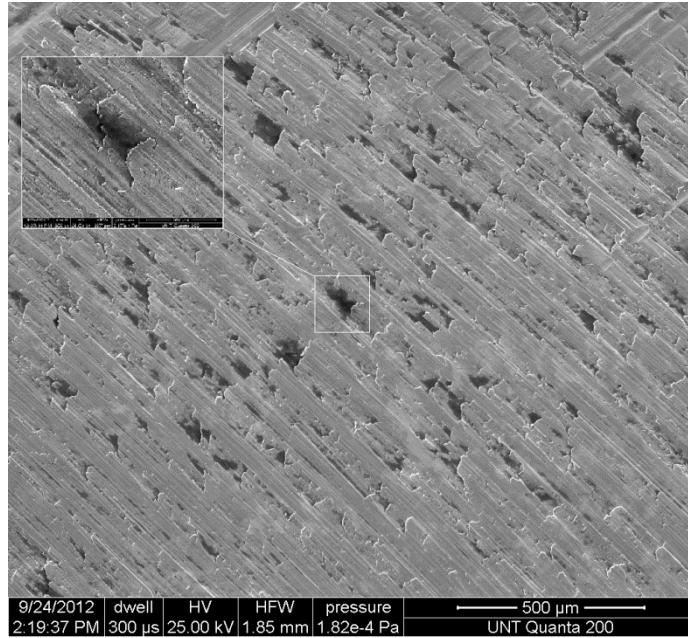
SEM micrograph of workpiece for treatment 80 SFM and 0.003 IPT showing abrasive wear through plowing mechanism.
